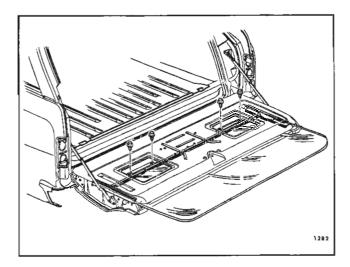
F20-Tail Gate Inner Panel Cams Attachment
